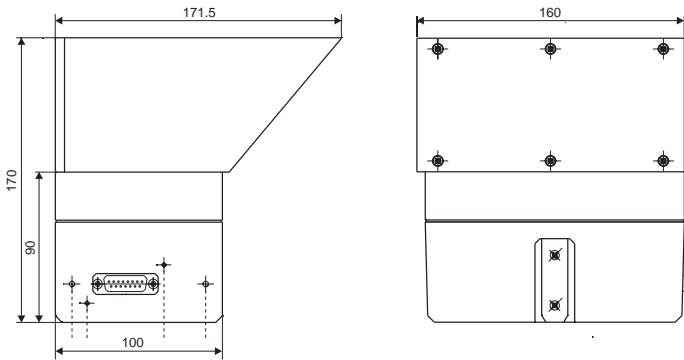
Dimensioned drawing of BCL 80 with oscillating mirror add-on
